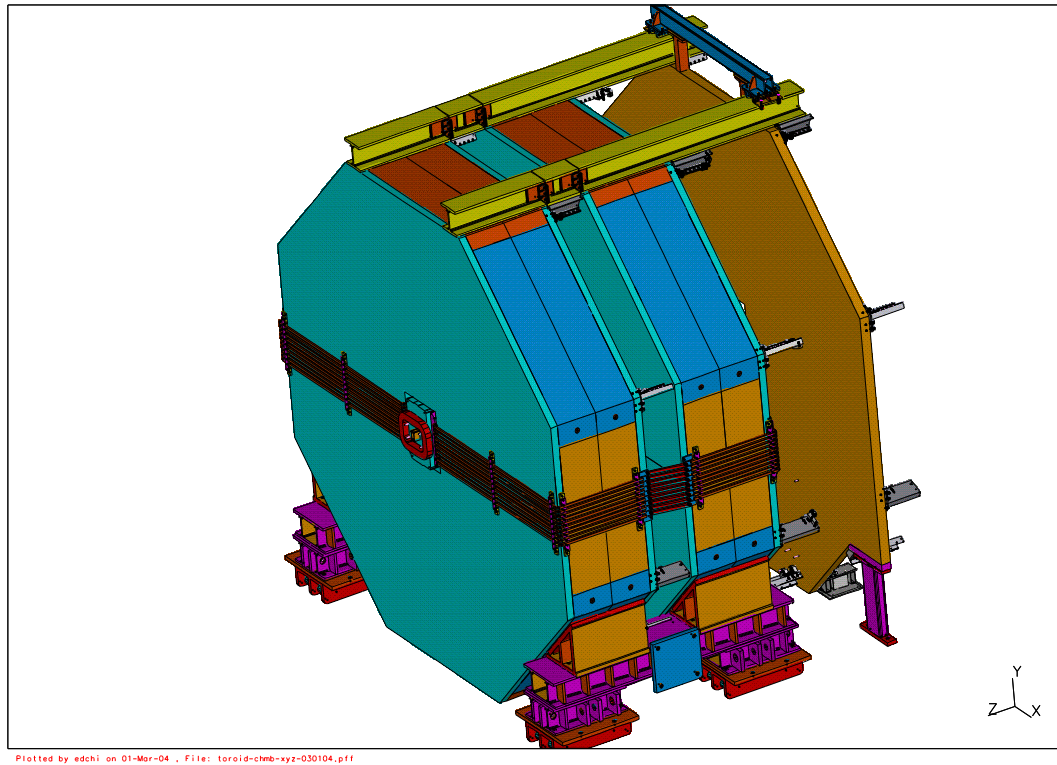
The north Muon Toroid Assembly. This view shows the north toroid assembly ready to be rolled into the Collision Hall. It includes the muon chamber support structure and filter and the roller assembly. The south toroid assembly will reuse the same roller assembly and will not have the muon chamber superstructure.
